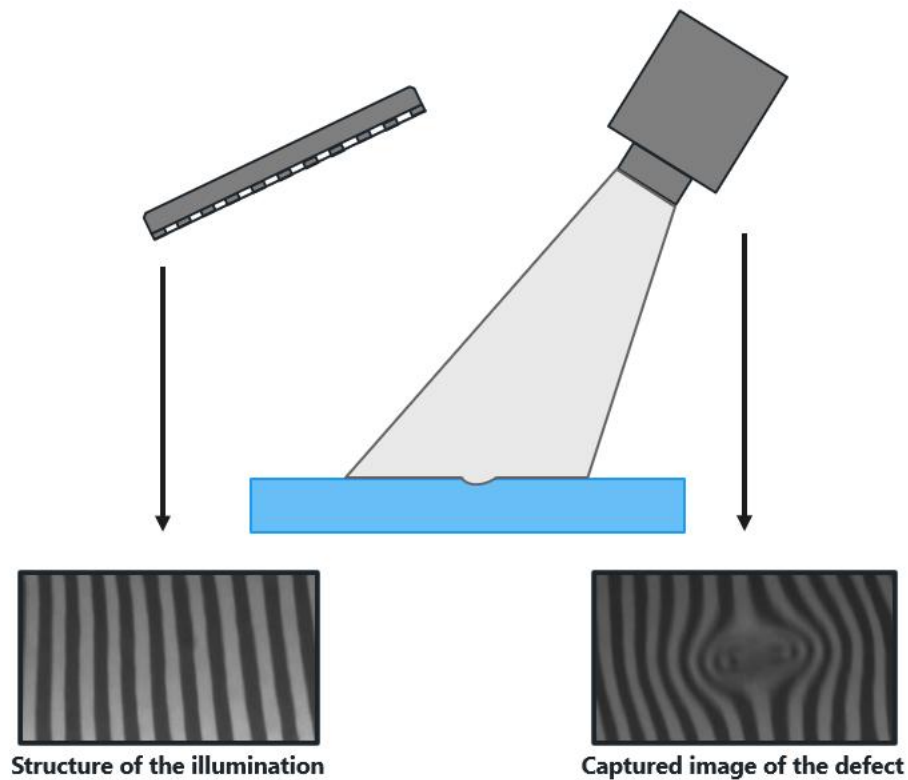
Surface defect inspection with a monochrome machine vision camera and structured illumination. From: the author (2026), based on [23].
